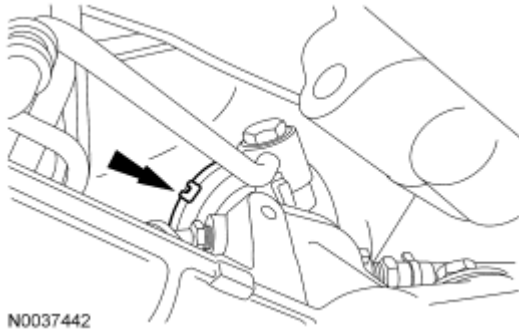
Locating Steering Gear-To-Dash Seal Clips
